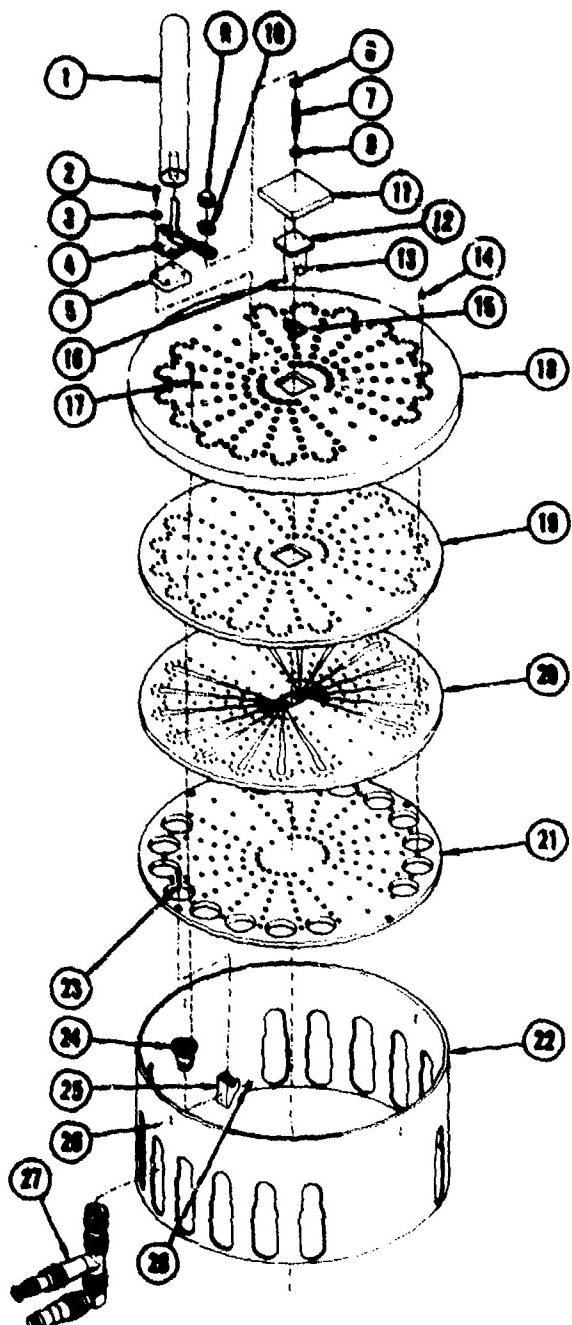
Dual In-Line Package Test Fixture (Exploded View)
